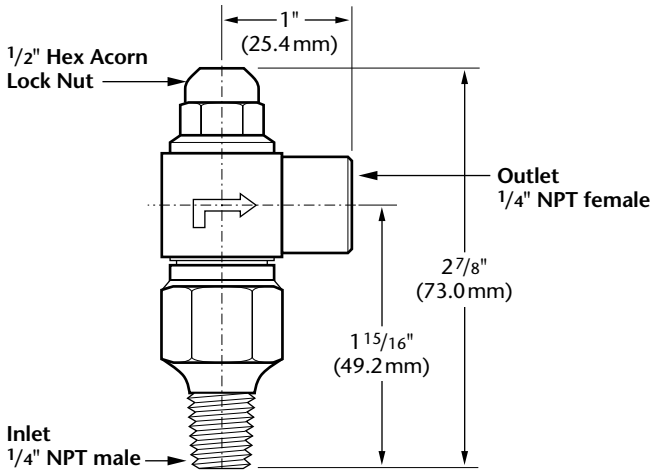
Series RV5570–50 thru RV5570–3000 Dimensions
